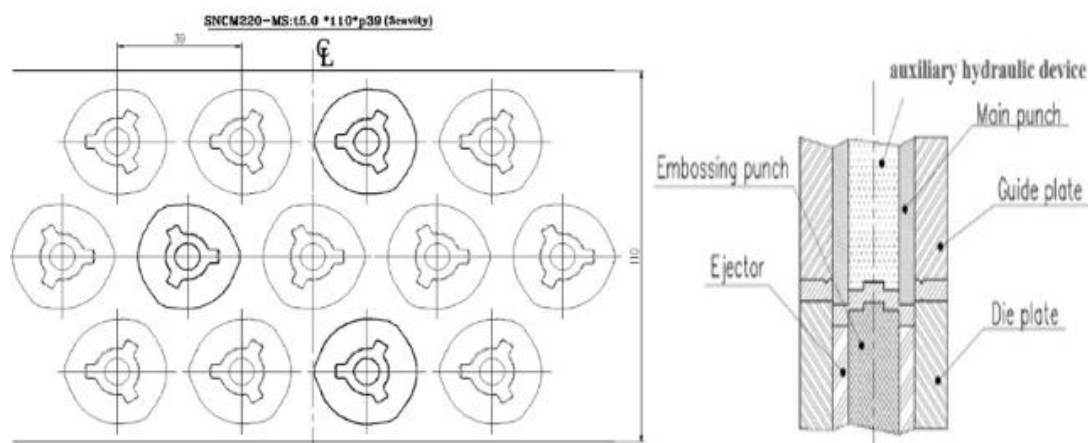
Strip layout and structure of compound FB tool for the PCC.
